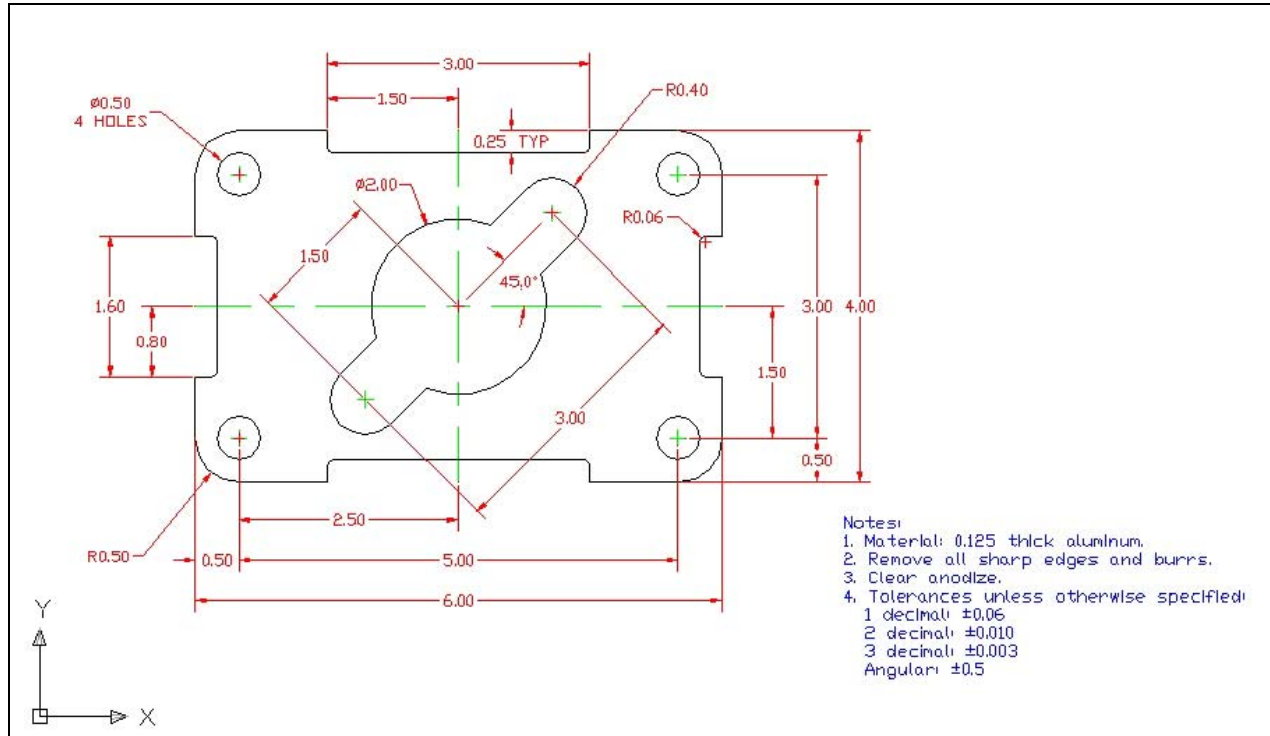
Rectangle Drawing in Fundamentals of 2D Drawing
